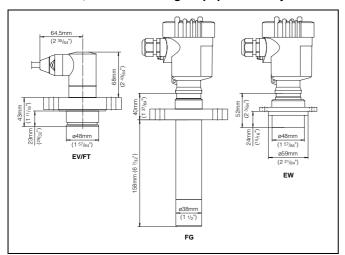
VEGABAR 64 extension fitting for paper industry: EV/FT = absolutely flush for pulper (EV2-times flattened), FG = extension for ball valve fitting, EW = flange for manometer lug
